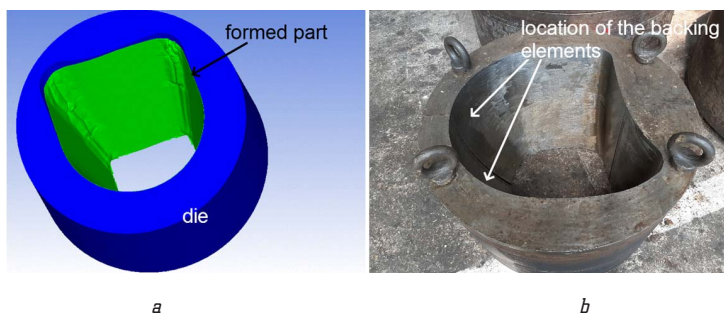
Preparation for explosive forming of a «Housing» part: *a* – layout diagram of the workpiece (red) inside the die (blue) cavity; *b* – stages of forming tooling assembly
